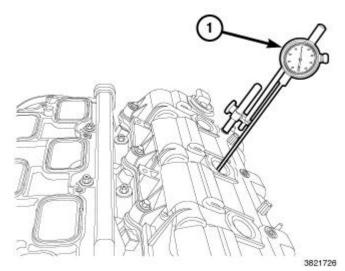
Positioning Dial Indicator & Setting #4 Cylinder At Top-Dead-Center Compression Stroke Courtesy of CHRYSLER GROUP, LLC
